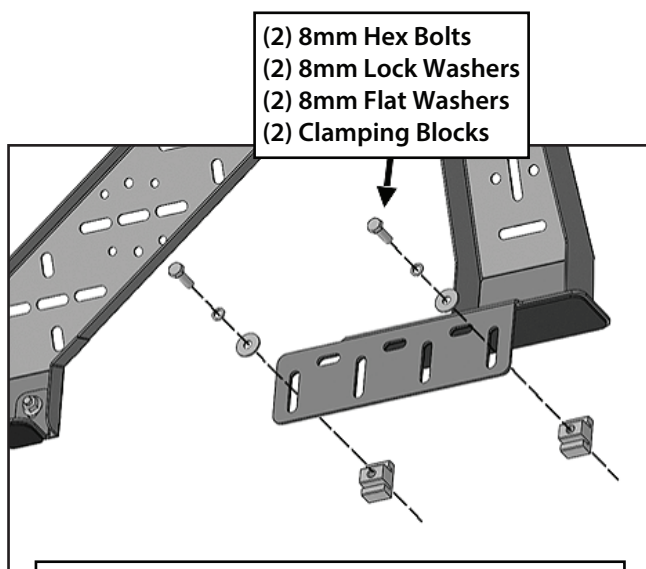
Attach the Overland Bed Rack assembly to the Block Nuts
